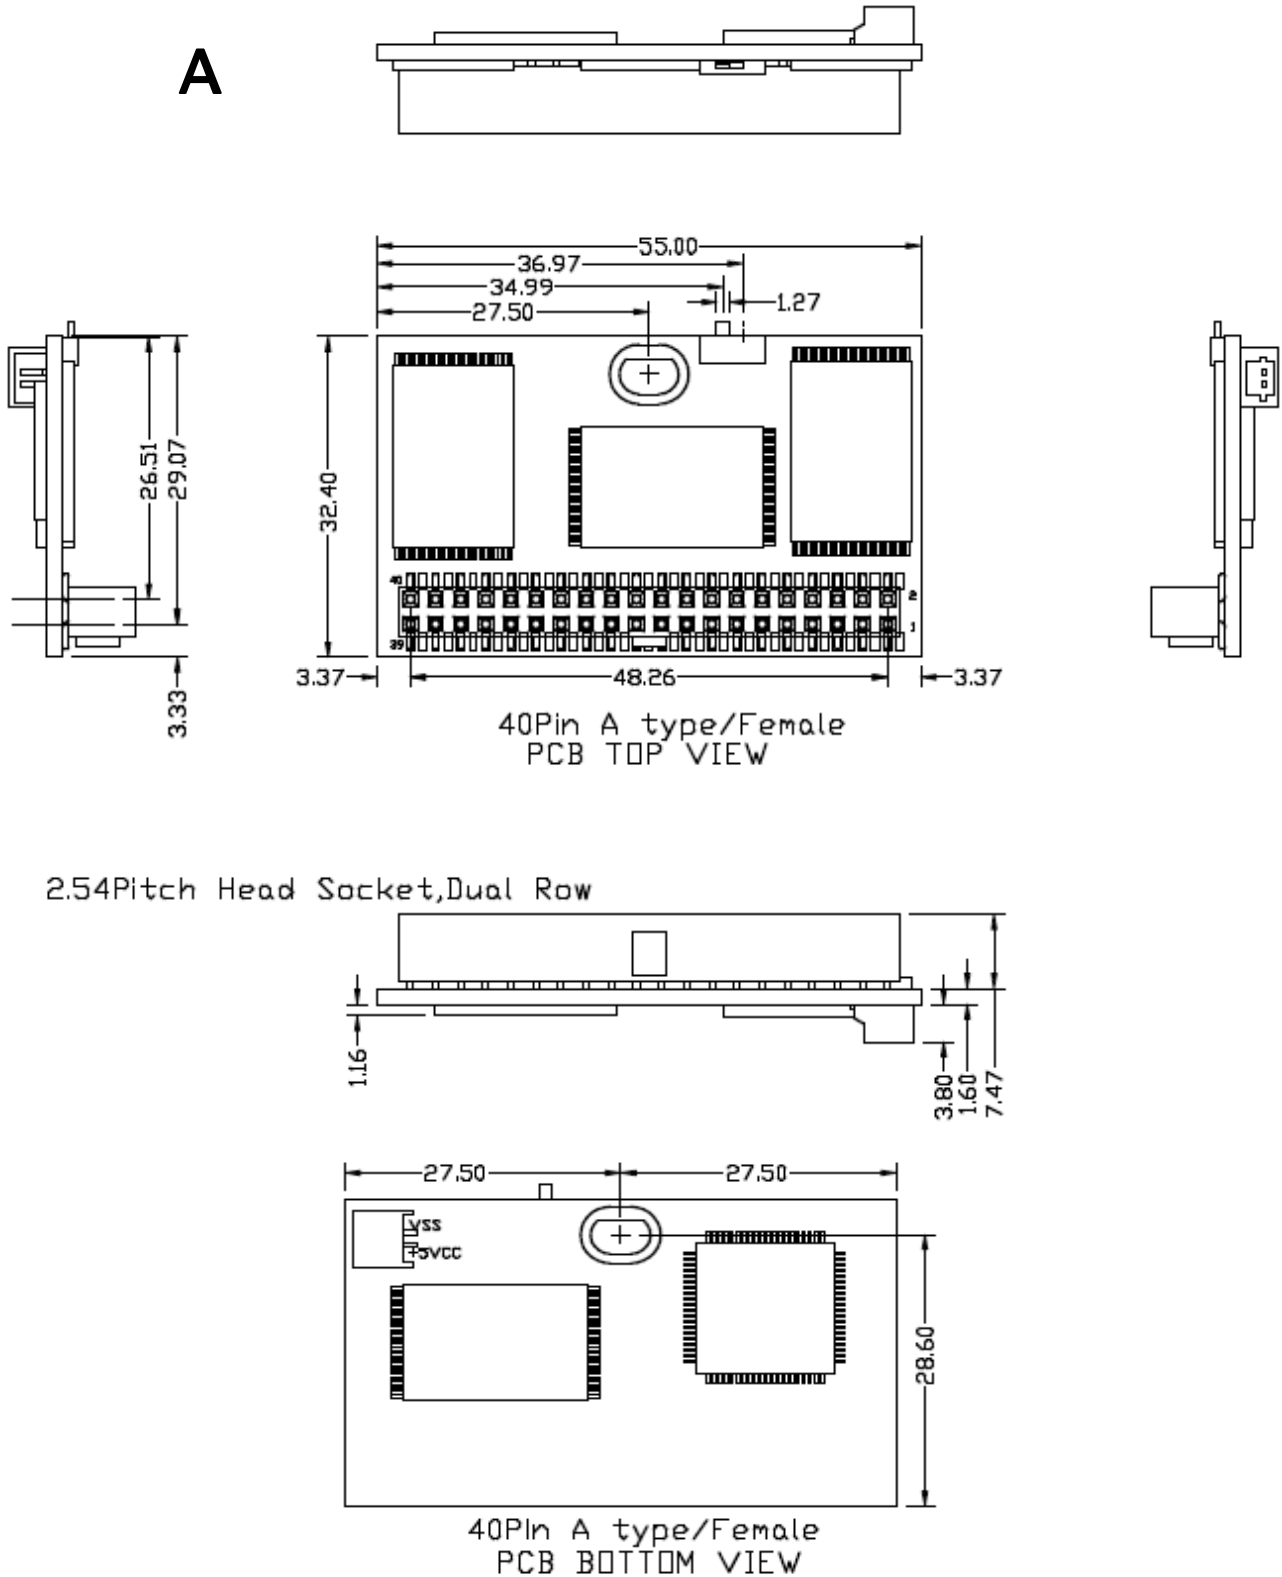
Mechanical Dimension of EDC1SE 40-pin (Horizontal Female Type A)
